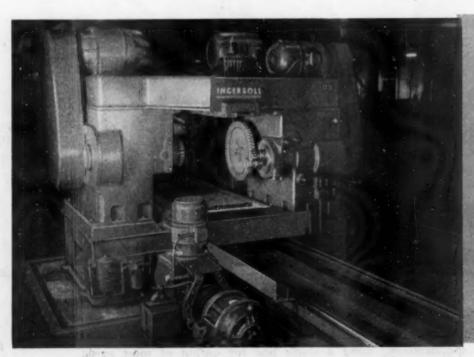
Cutters located on top and sides of bridge type milling machine multiple mill bearing locks, pan surface and top of block.
